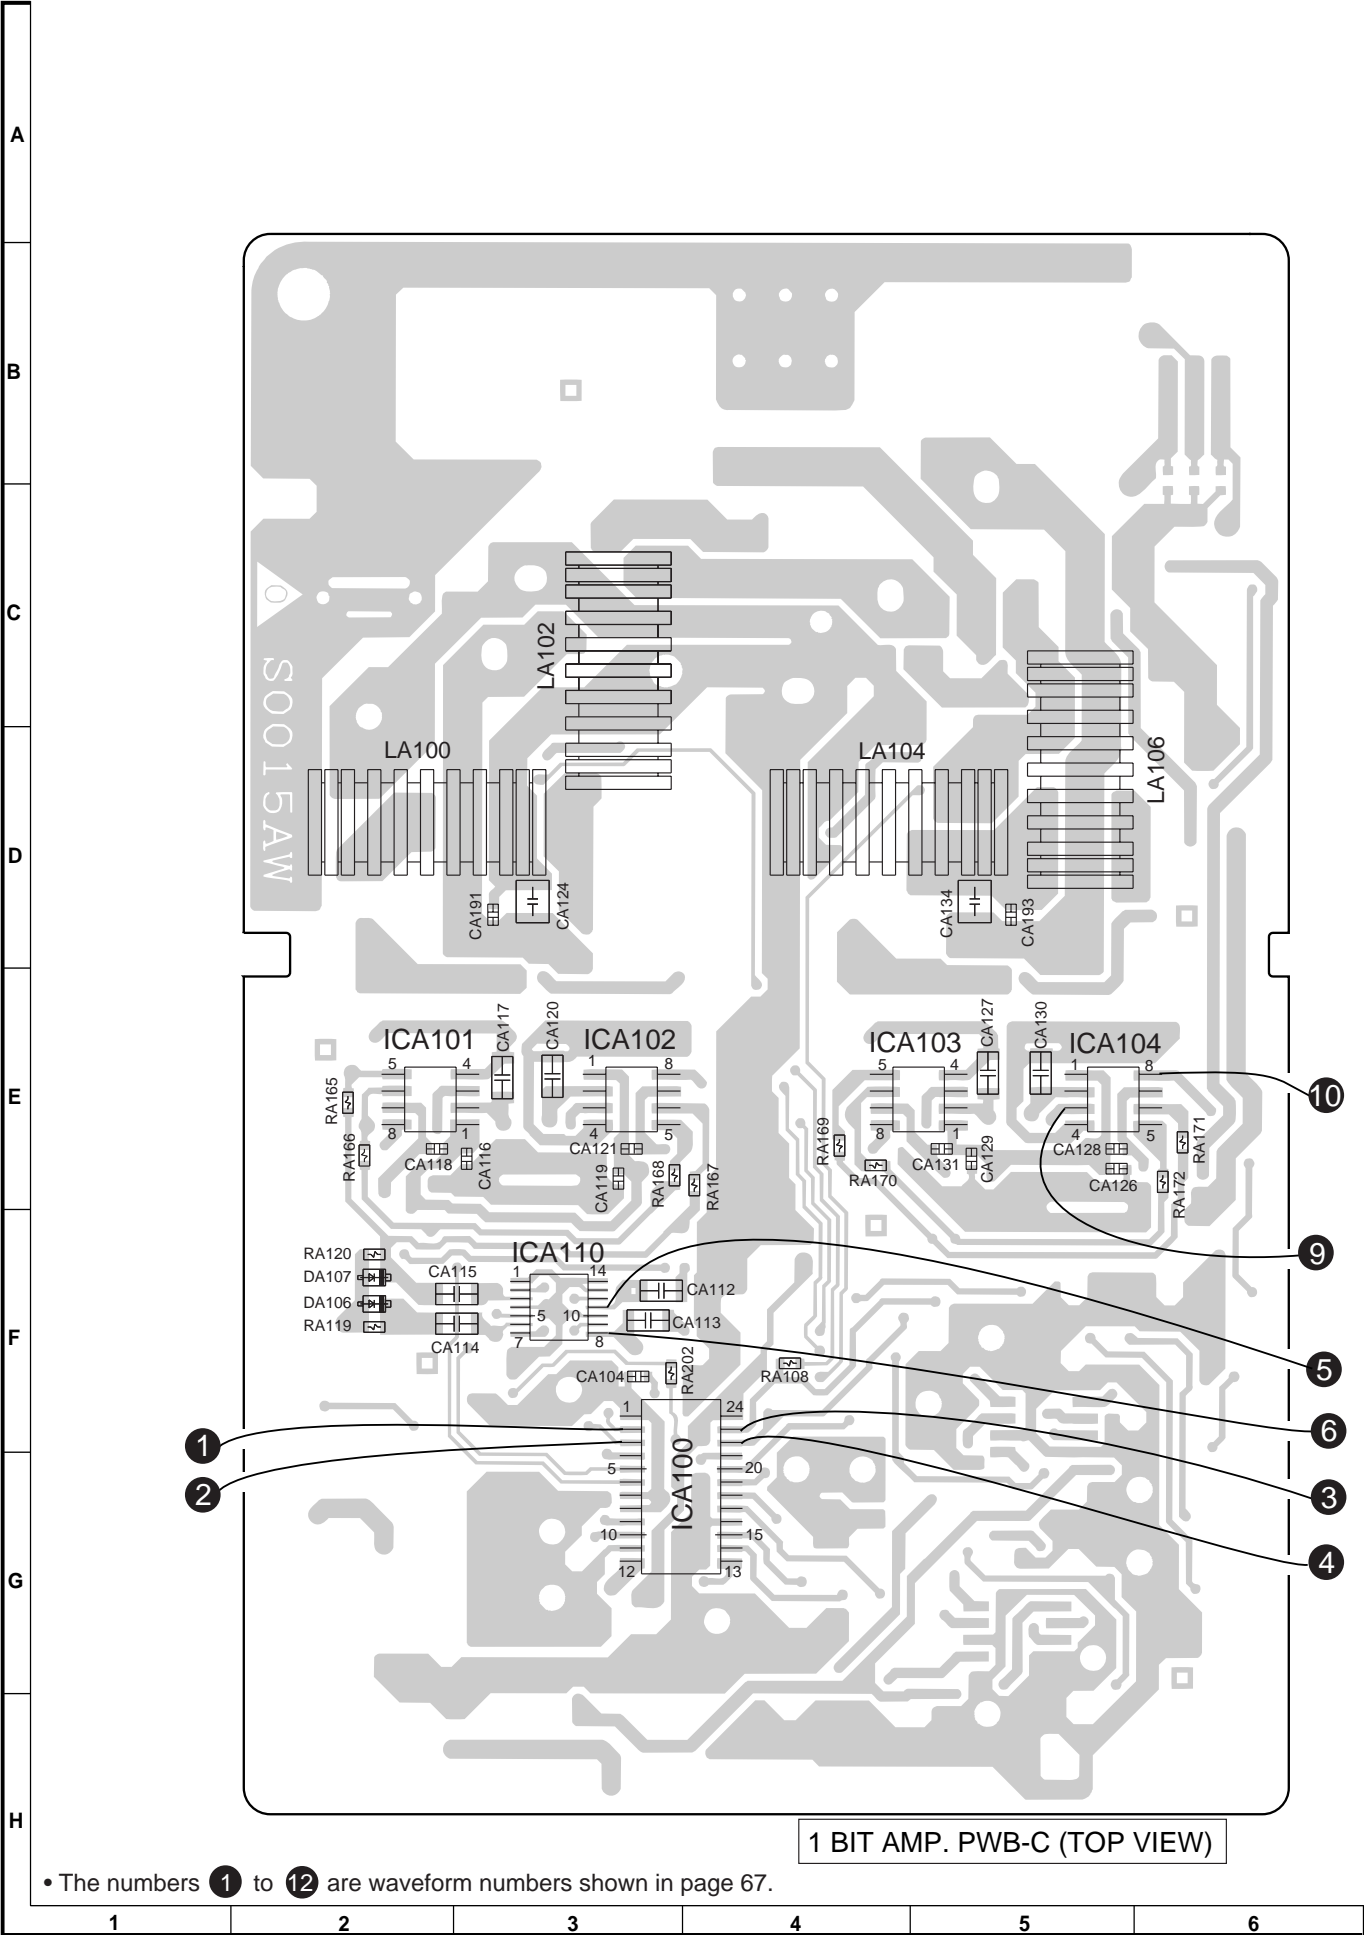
WIRING SIDE OF P.W.BOARD (9/13)
